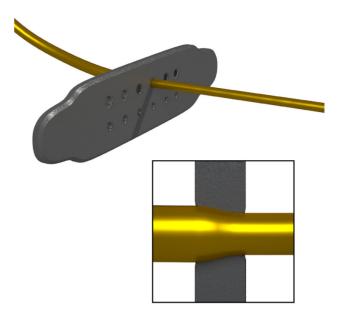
Wire drawing showing how the wire is compressed and elongated by wire drawing.
